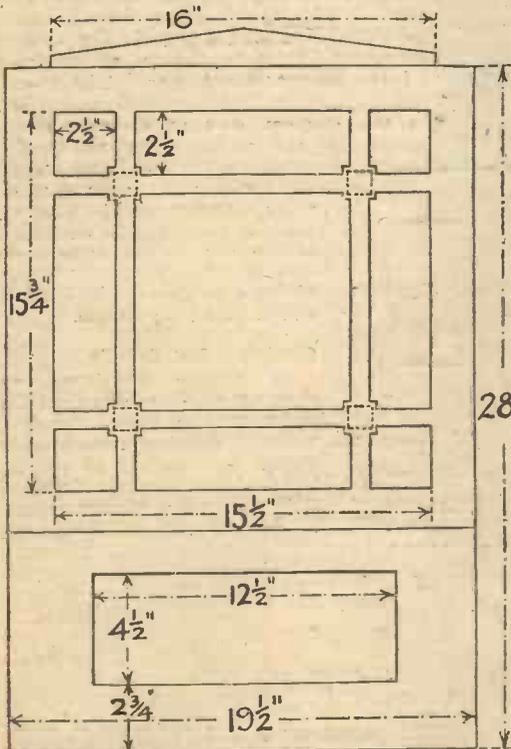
Front of cabinet with all necessary dimensions for making up.
